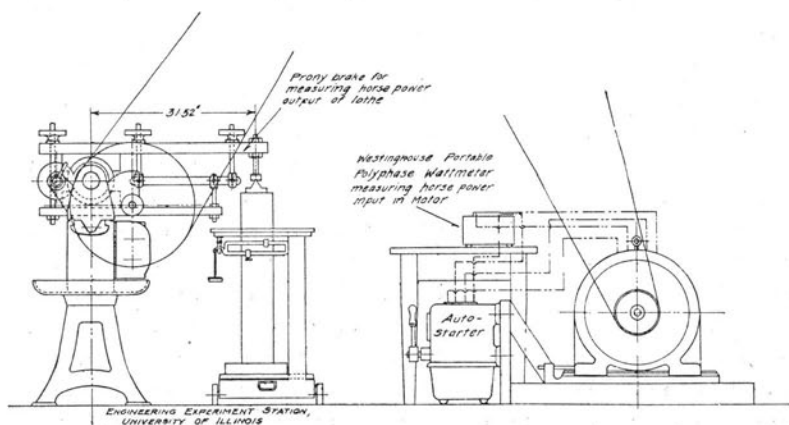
ARRANGEMENT OF APPARATUS FOR MEASURING POWER ABSORBED BY FRICTION IN THE LATHE, COUNTER-SHAFT AND BELTING
